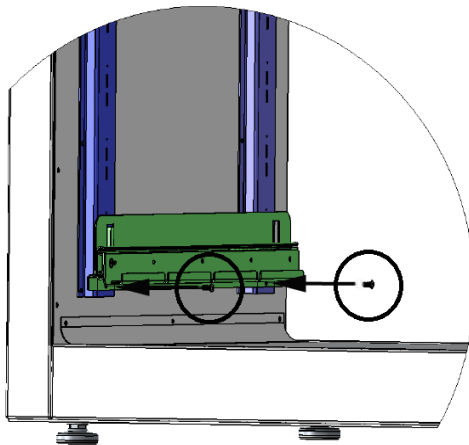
Sliding Shelf Mounting Bracket Installation
